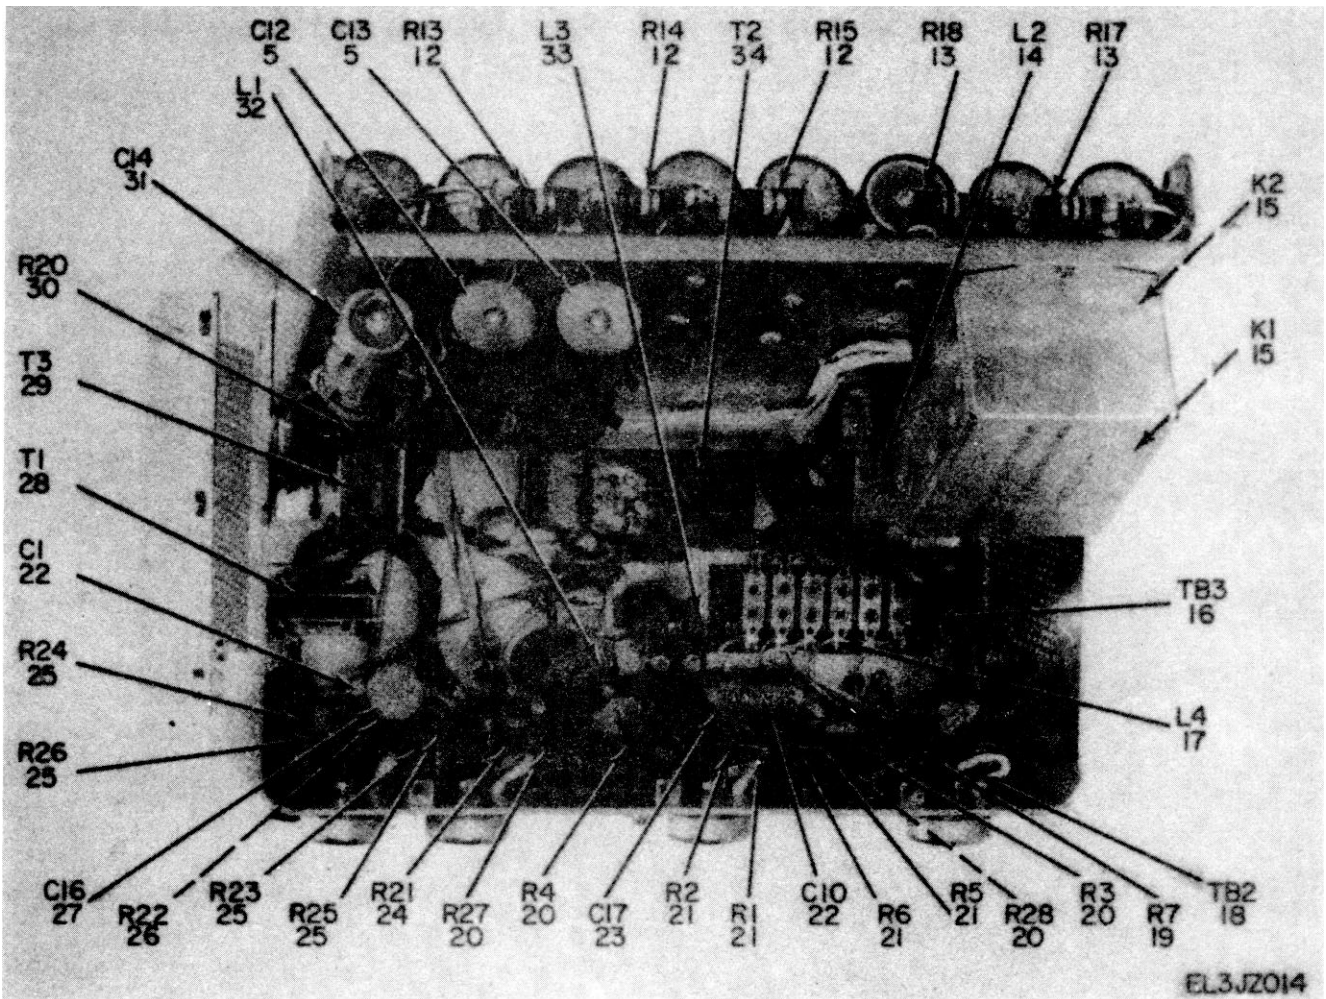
Power Supply PP-4765/GRC-159(V), Cover Removed (Sheet 2 of 2).
